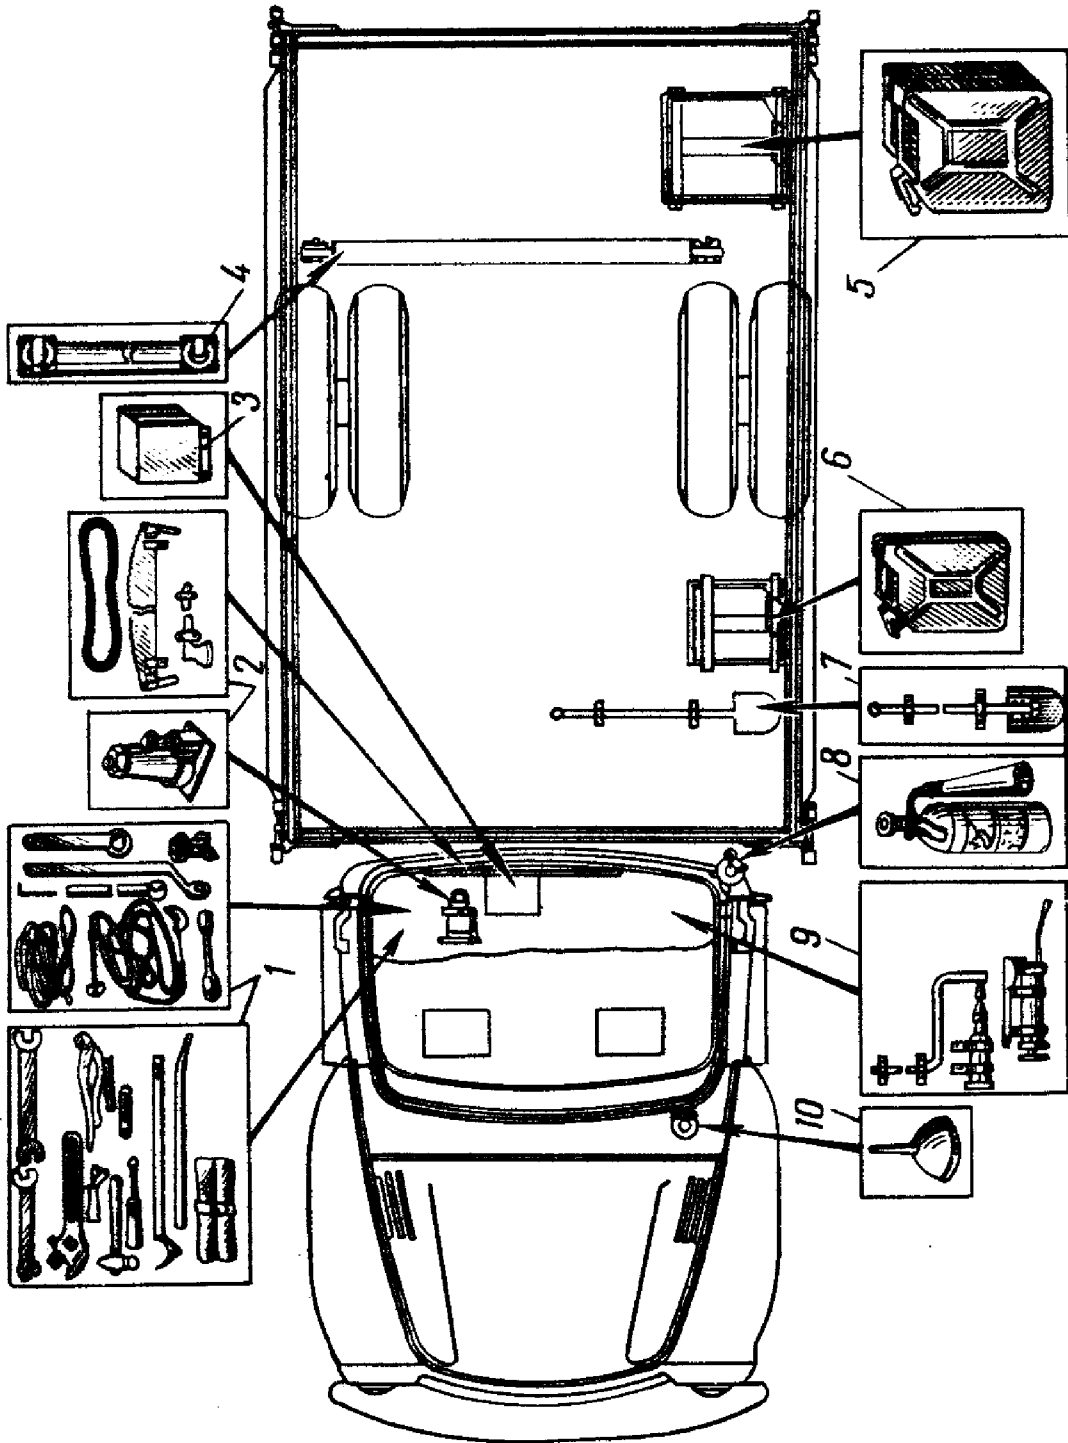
LAYOUT AND FASTENING OF TOOLS AND ACCESSORIES ON 3M1-130 TRUCK
